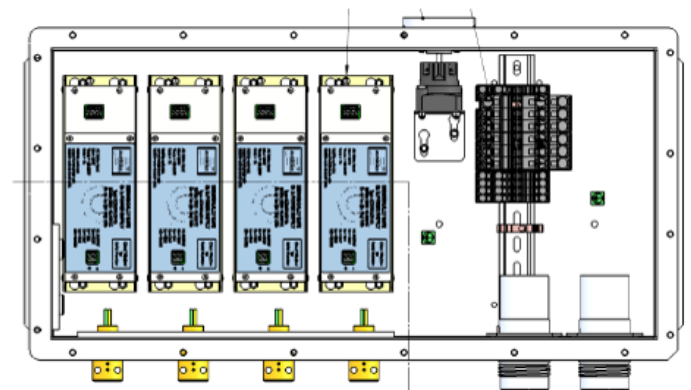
LPU57-4 with cover removed showing a typical layout.
